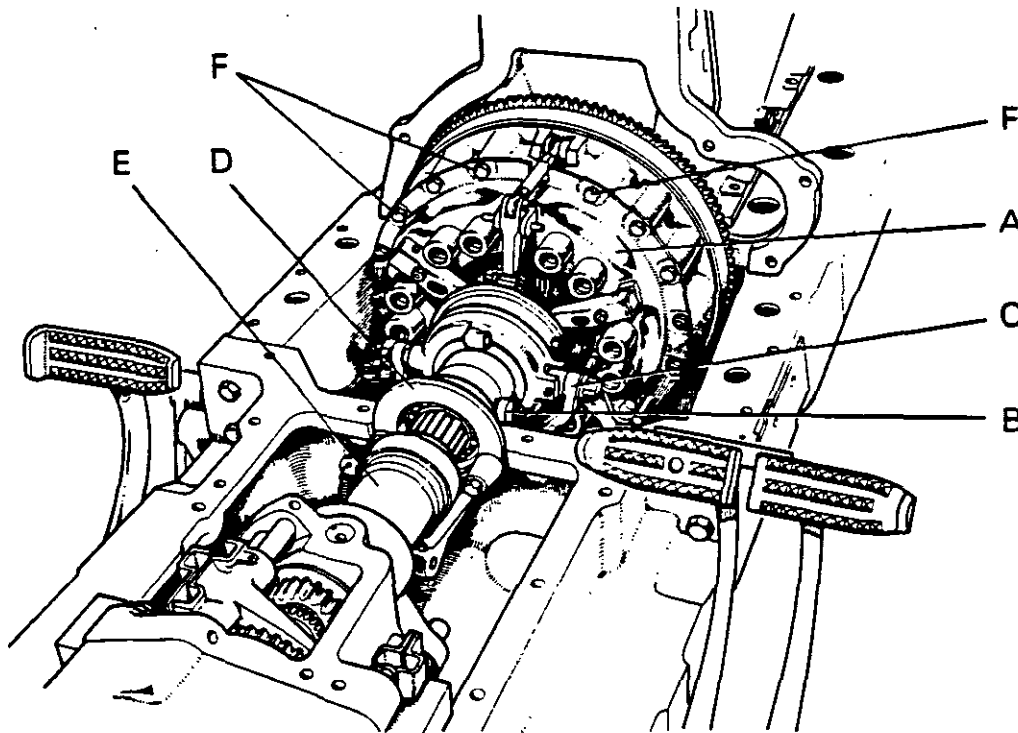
1200 TRACTOR WITH CLUTCH HOUSING AND GEARBOX COVER REMOVED
